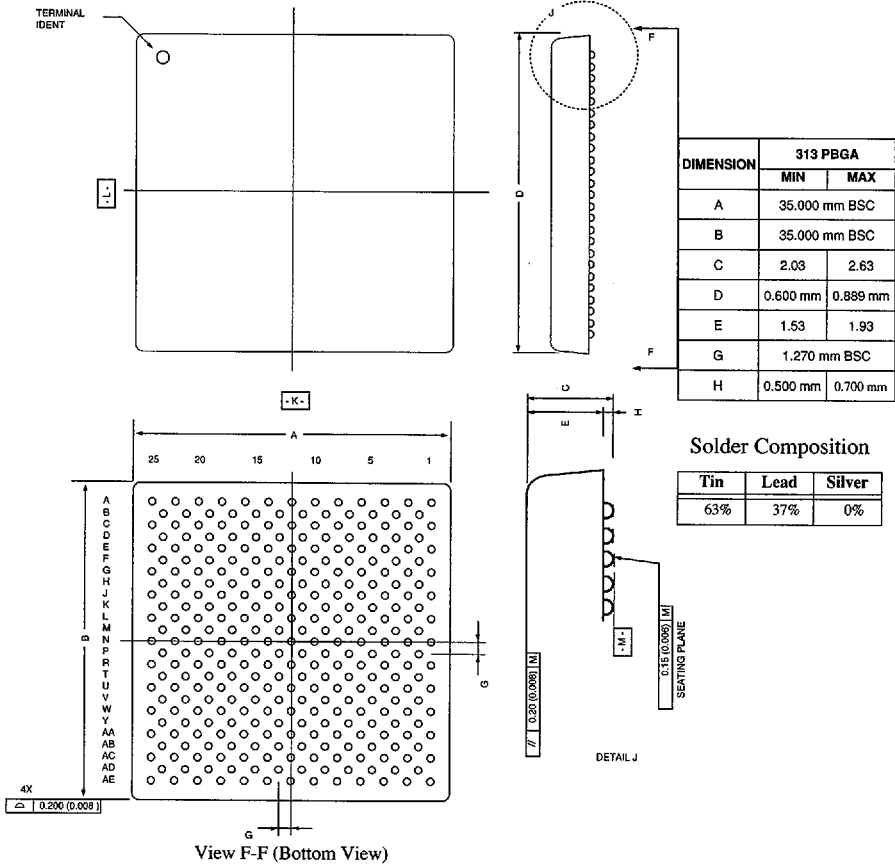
Mechanical Dimensions for 313-Pin Plastic BGA Package
